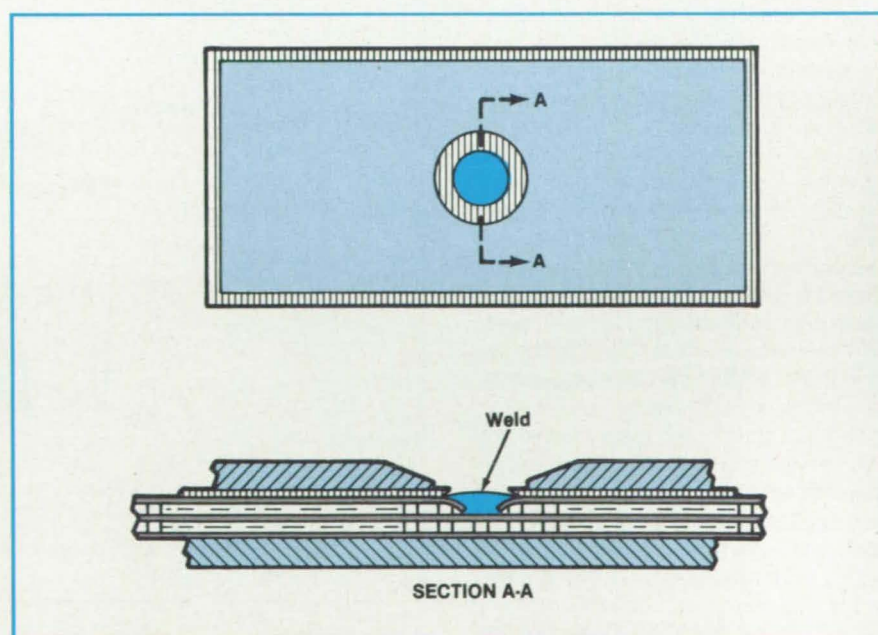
The Weld Melt flows beyond the edge of the undercut, where heat checking and cracking do not take place. Thus, the entire weld is free of cracks and heat checks.
